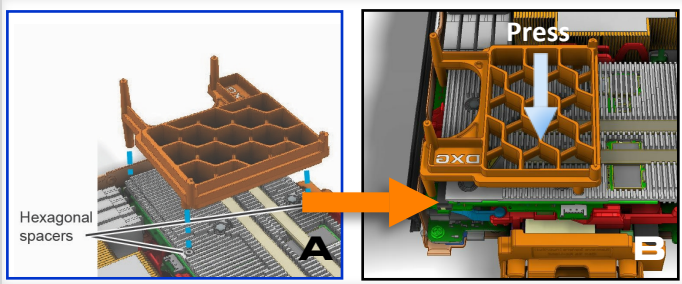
(A) Locate the insertion tool. (B) Push on the tool to install the DXG
